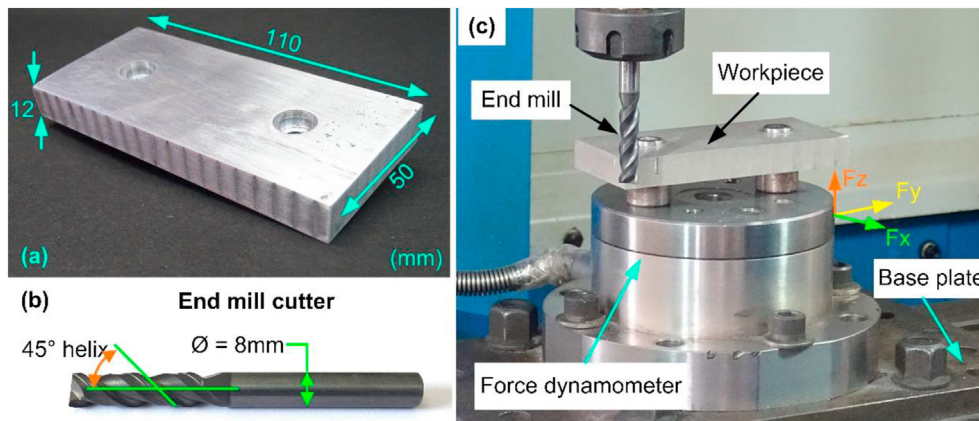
(a) AZ31 magnesium alloy workpiece, (b) carbide end mill, (c) experimental set.
